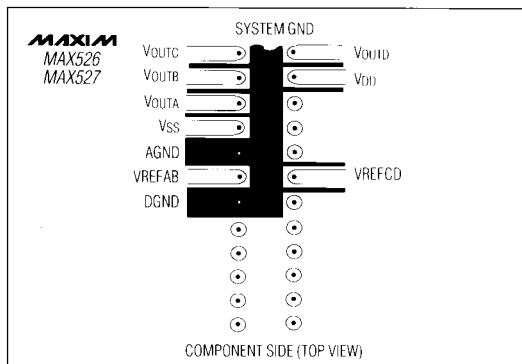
Suggested PCB Layout for Minimizing Crosstalk
